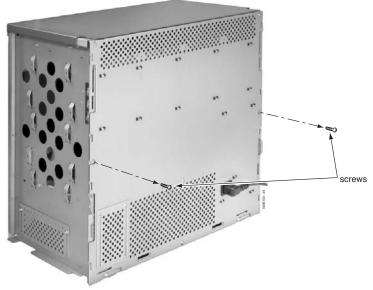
REMOVE THE SCREWS FROM THE CABINET
